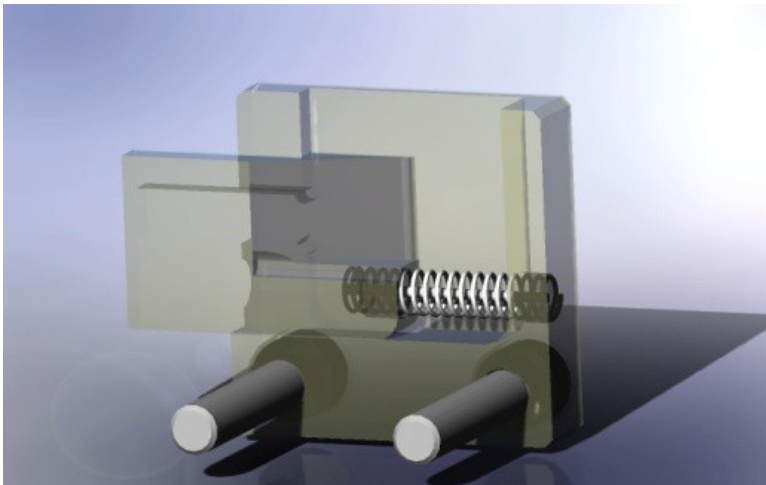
Slider assembly installed into the latch block housing, with M6 socket head cap screws inserted.
